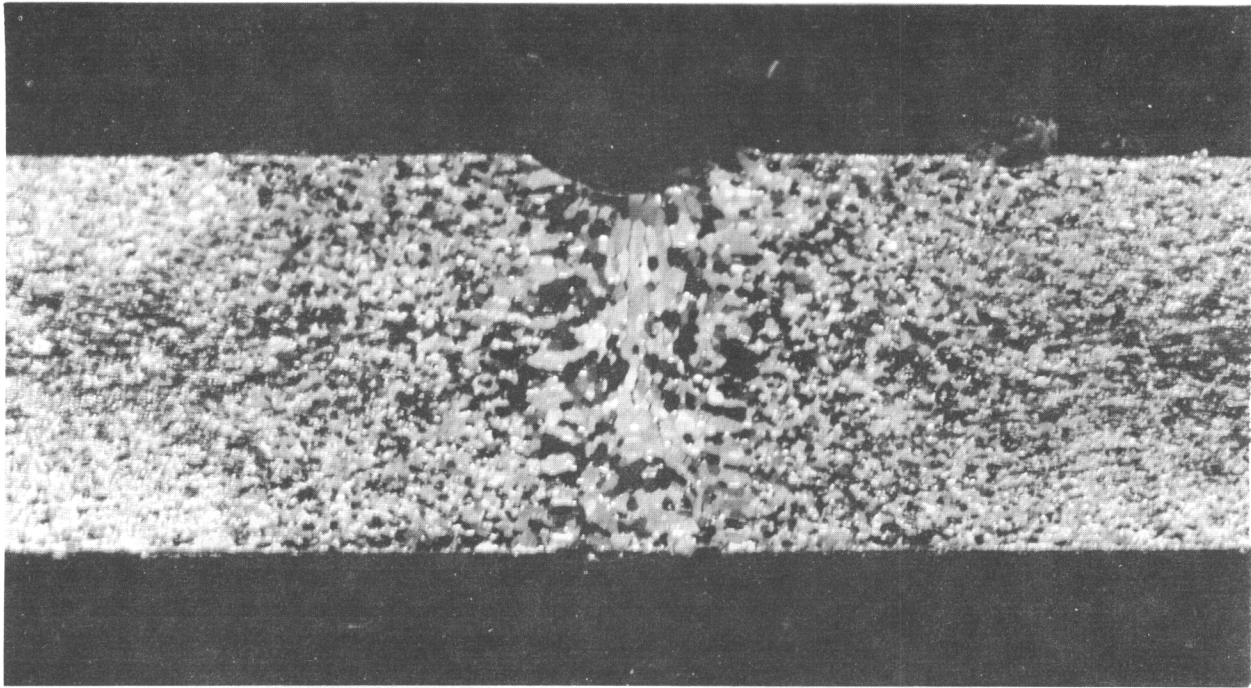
Trial Weld Cross-section; X20; 0.100-in. Tungsten; 135KV, 11ma, 14ipm, 0.020-in. Y oscillation
